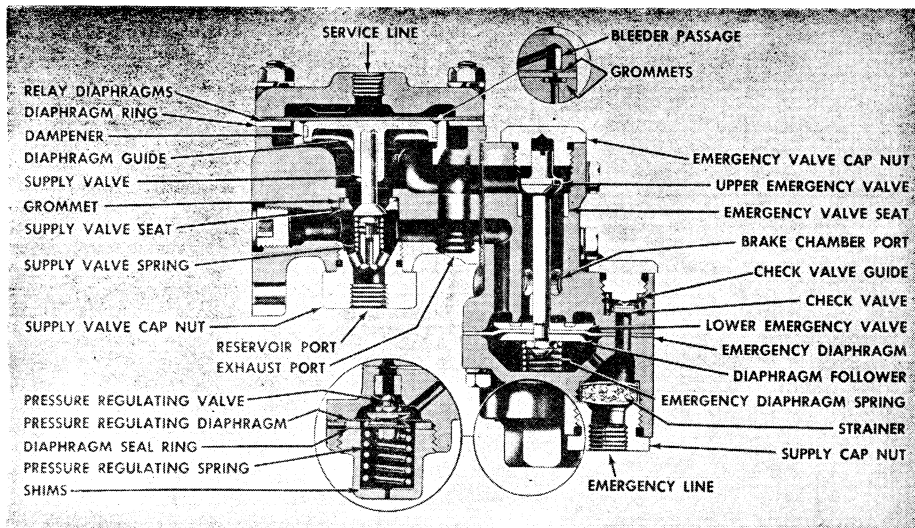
Sectional view of Type RE-1C Relay Emergency Valve
